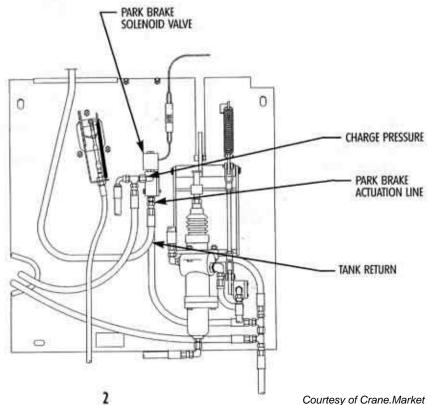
BOTTOM OF FLOORPLATE ASSEMBLY P/N 9112-5053 P/N 9132-5066 (TURBO)
